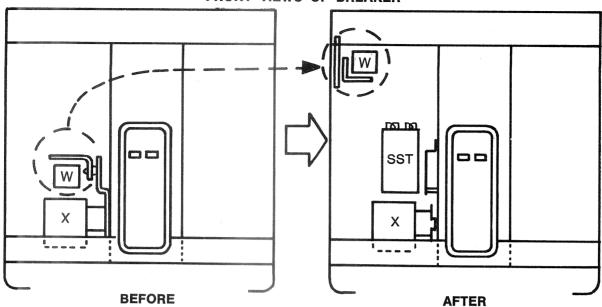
Remounting of "W" and "X" relays — required only on quickclose, electrically operated breakers equipped with EC trip devices.
